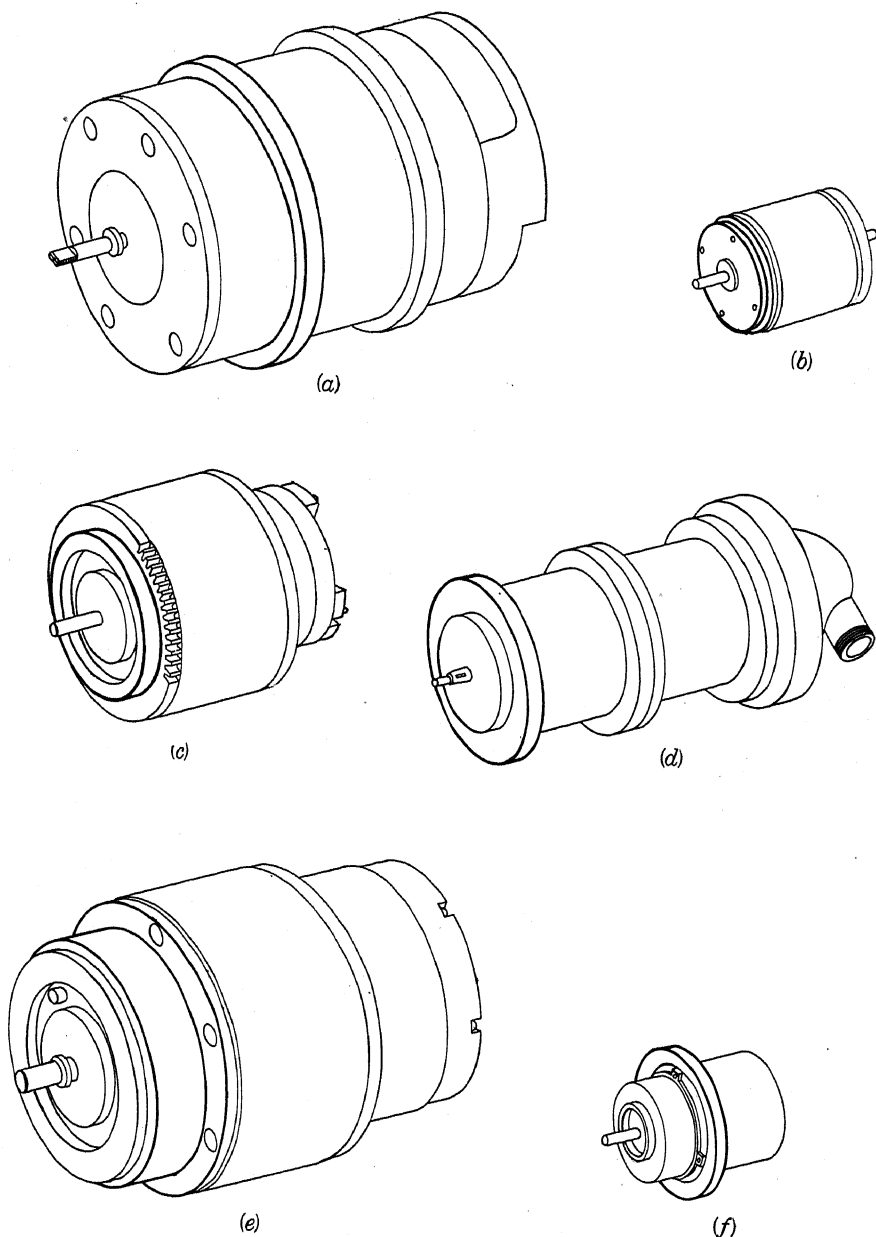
Typical synchro mountings. (a) Navy size 5 synchros, also certain Army styles; (b) Bendix-Pioneer AY-100 series; (c) Diehl Frame B173185; (d) GE size 1 aircraft synchro; (e) Army Type VIII, IX, etc.; (f) Bendix-Pioneer AY-1 series. (Mounting and locating surfaces outlined in heavy lines.)
